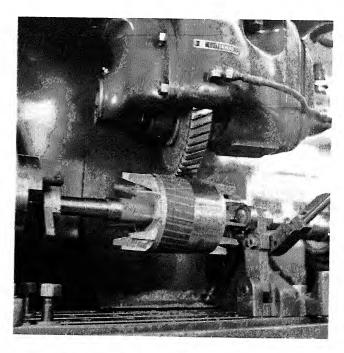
Production of rotors for F.H.P. motors. Former method: turning and grinding; new method: rotary machining on a shaving machine; saving: ten minutes per rotor. (Courtesy Brown, Boveri & Co., Ltd, Switzerland)
